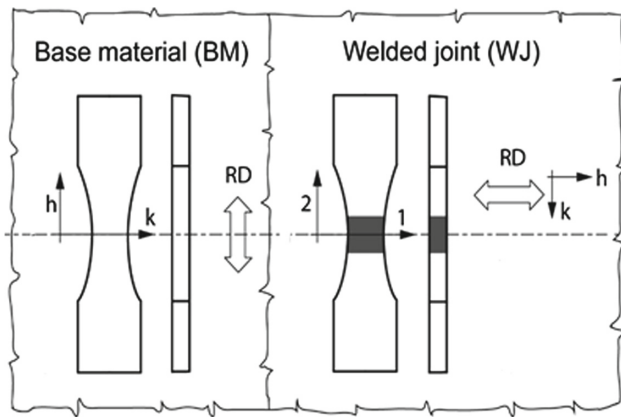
The geometry, the location and the designation of the HCF test specimens for base materials (BM) and welded joints (WJ).
